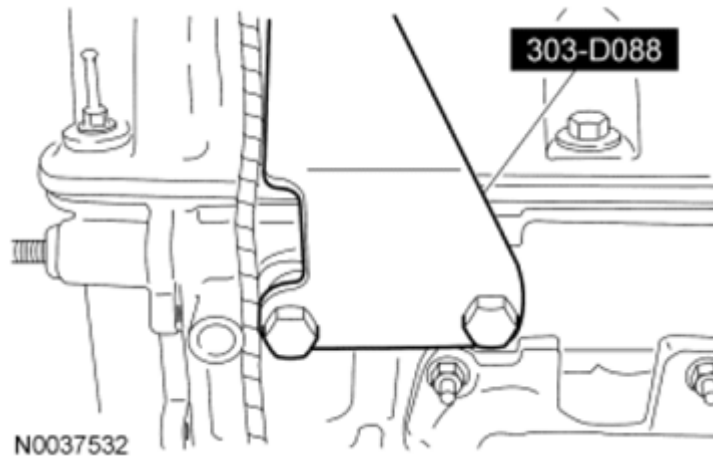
Installing Engine Lifting Bracket To LH Cylinder Head
